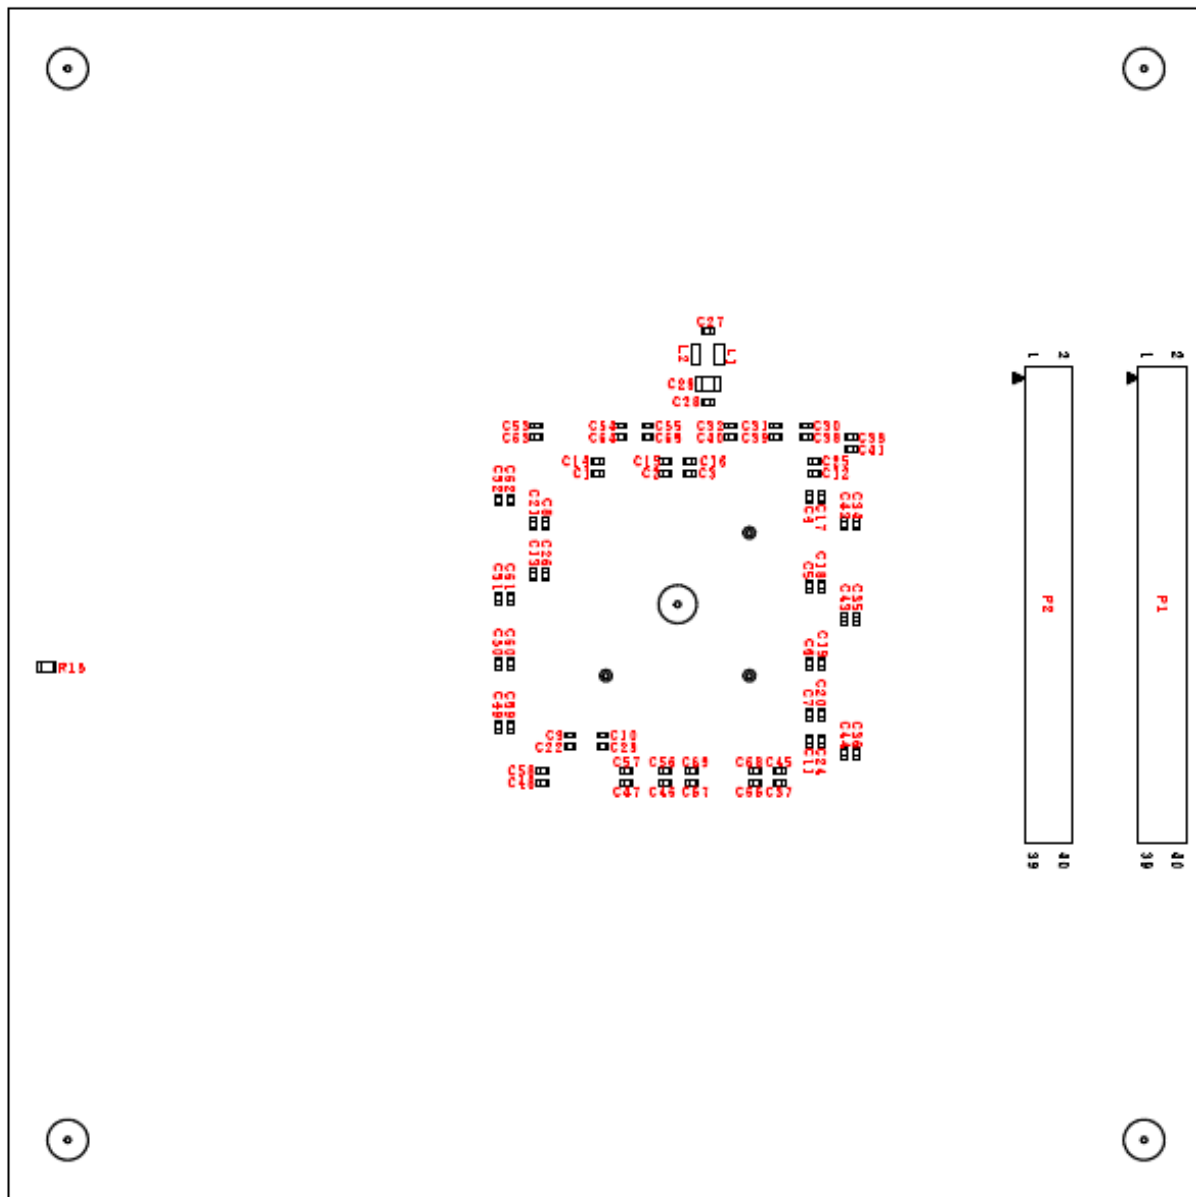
S5U13L02P00C100 Board Layout - Bottom View
